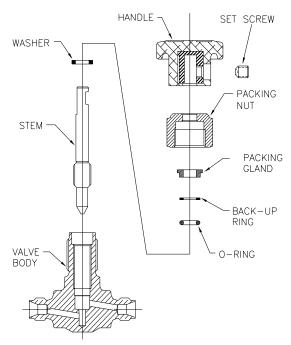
Exploded View of Needle Valve with O-Ring Packing
